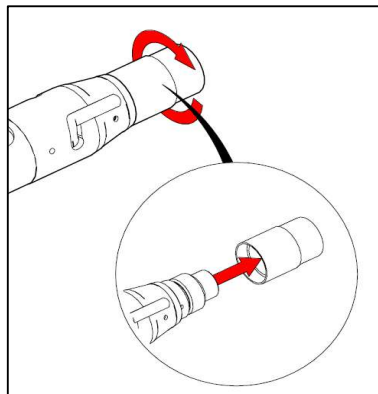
(i) : Removing the LLK-Q Window Assembly
